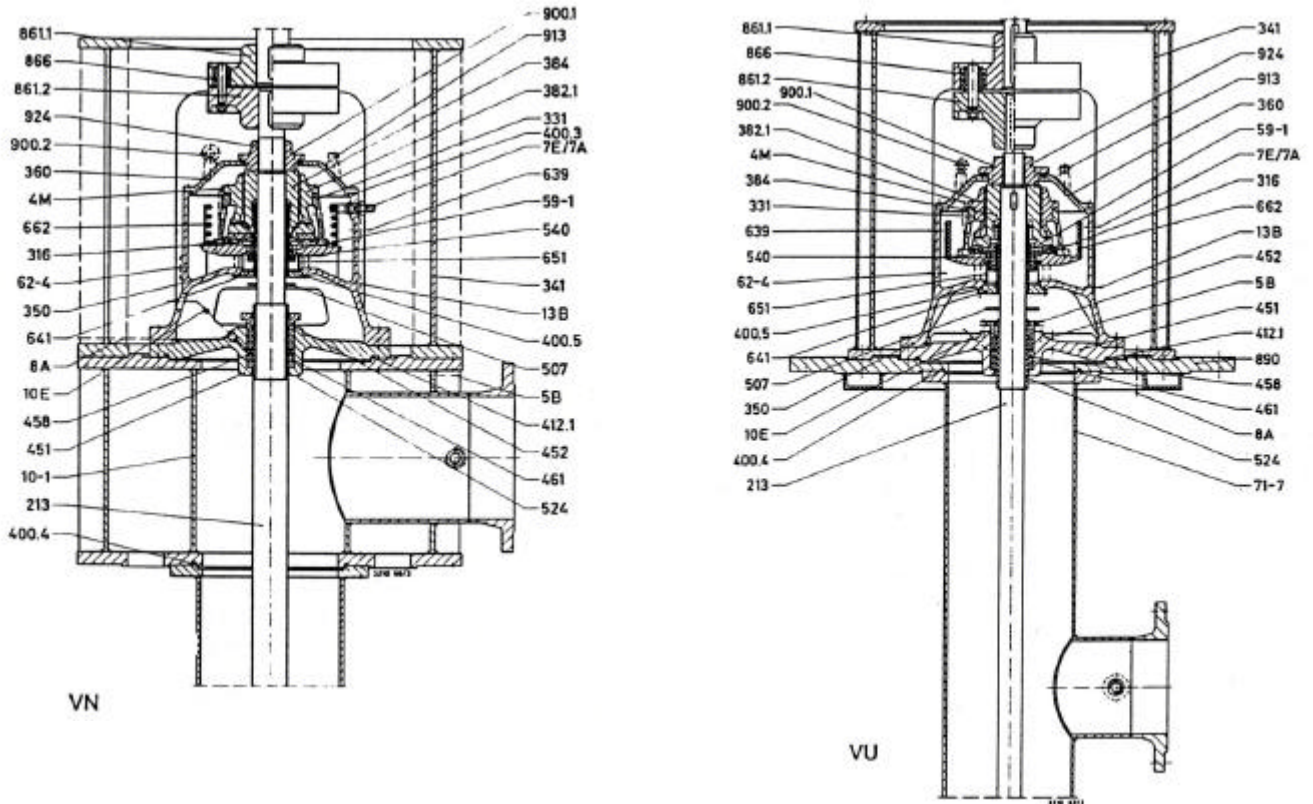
Drive stool for V1 motors, fitted with BUA antifriction bearing pedestal
